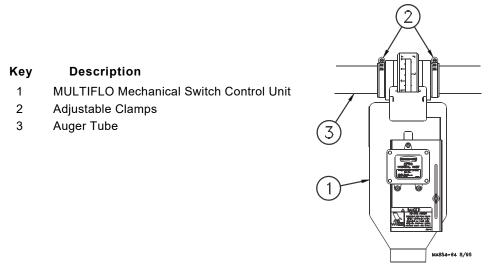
Mechanical Control Unit on a MULTIFLO Fill System (front view)
